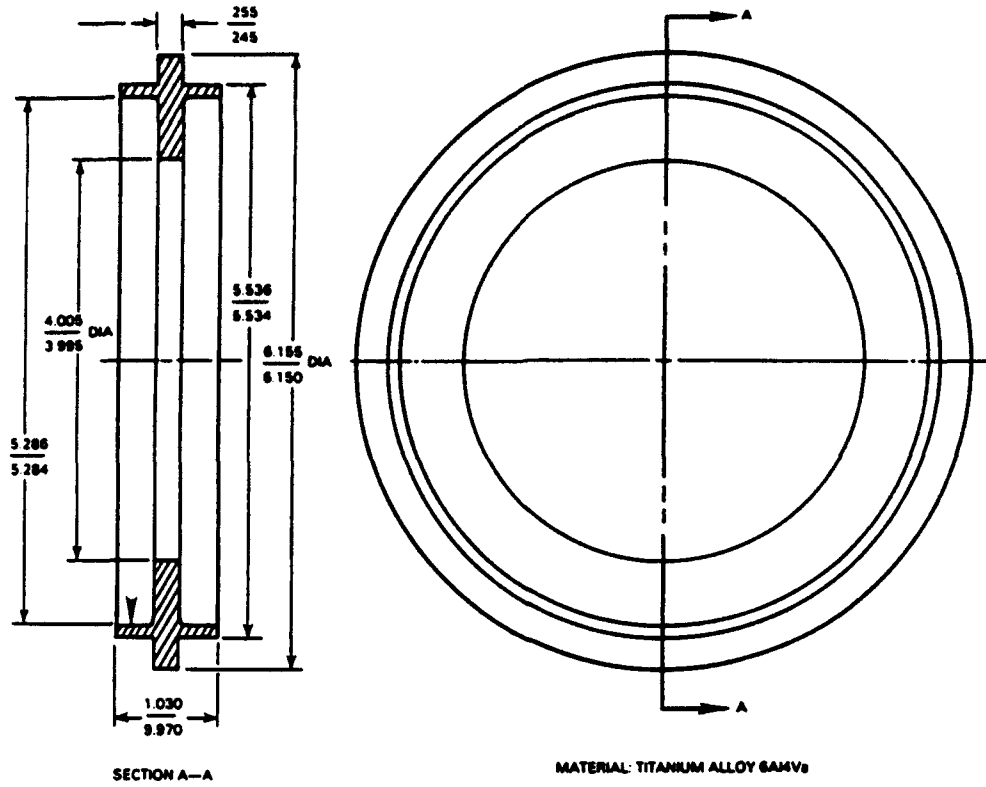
Joint ring stiffener B; critical pressure $\geq 18,000$ psi.
